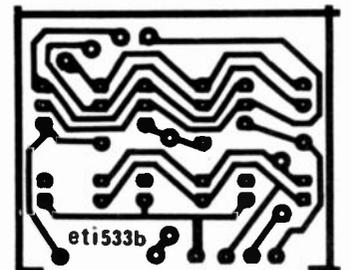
Printed circuit layout for the display board. Full size 41 x 35 mm.
